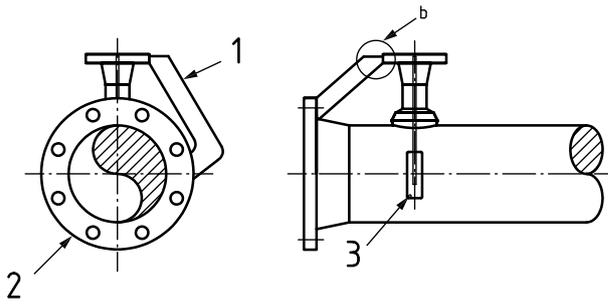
Typical application of bracing for branch connection to header of NPS 4 and below
